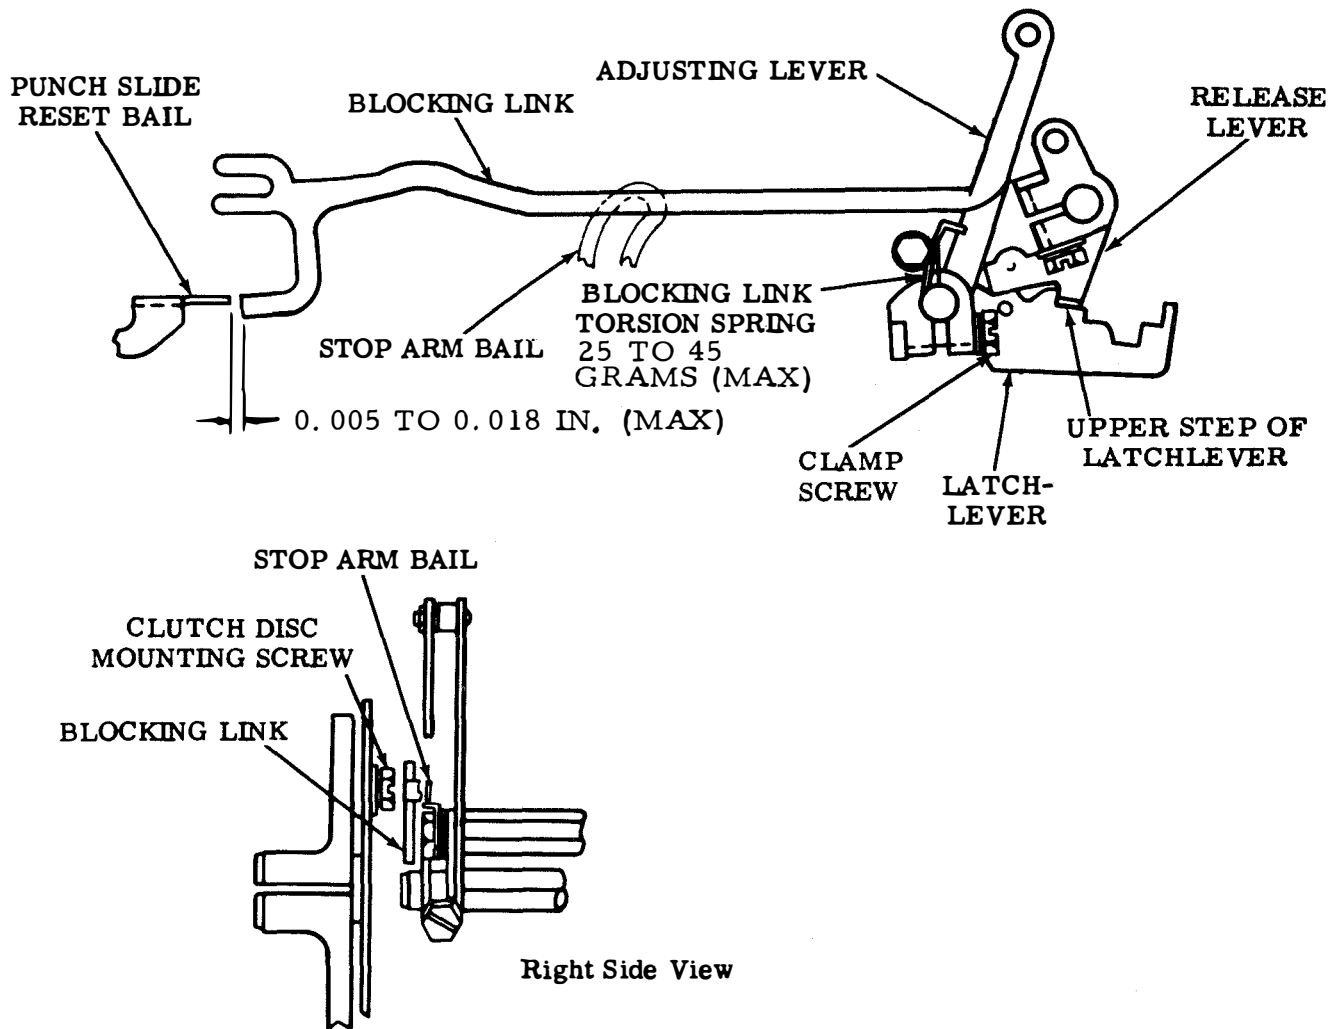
Blocking Link and Blocking Link Torsion Spring
